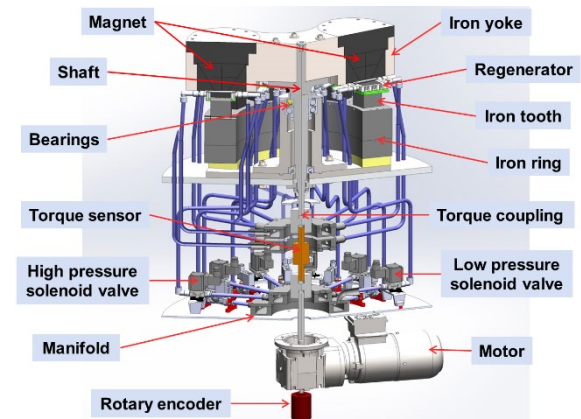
View cut of the rotary MCHP prototype “MagQueen” [15].
